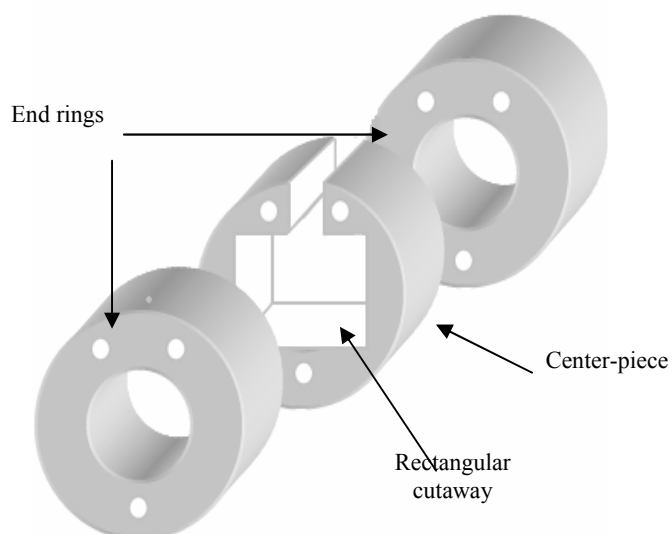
Sketch of the magnetic configuration for holding the magnets, composed of three non-magnetic stainless steel pieces, namely two end rings and one center-piece with a rectangular cutaway.
